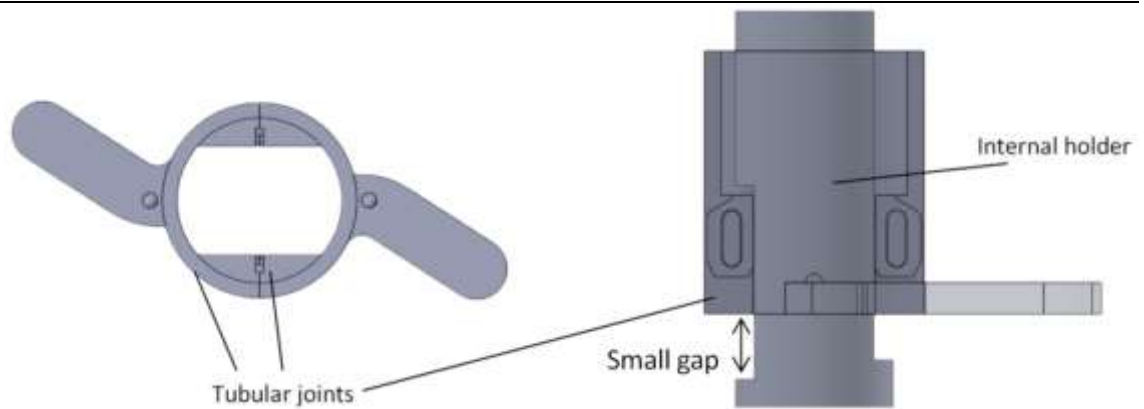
Top view of the tubular joints; Left view of the assembly comprised of tubular joints and the internal holder.
